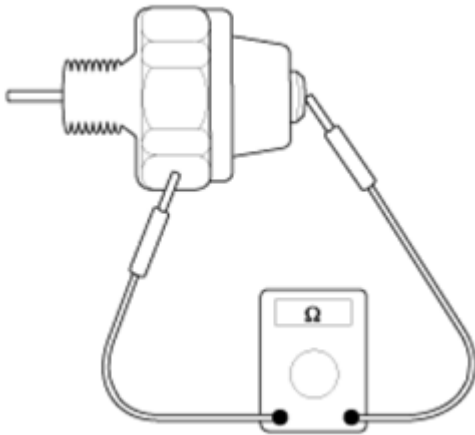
Checking Continuity Between Oil Pressure Switch Terminal & Body (Fine Wire Pushed)
